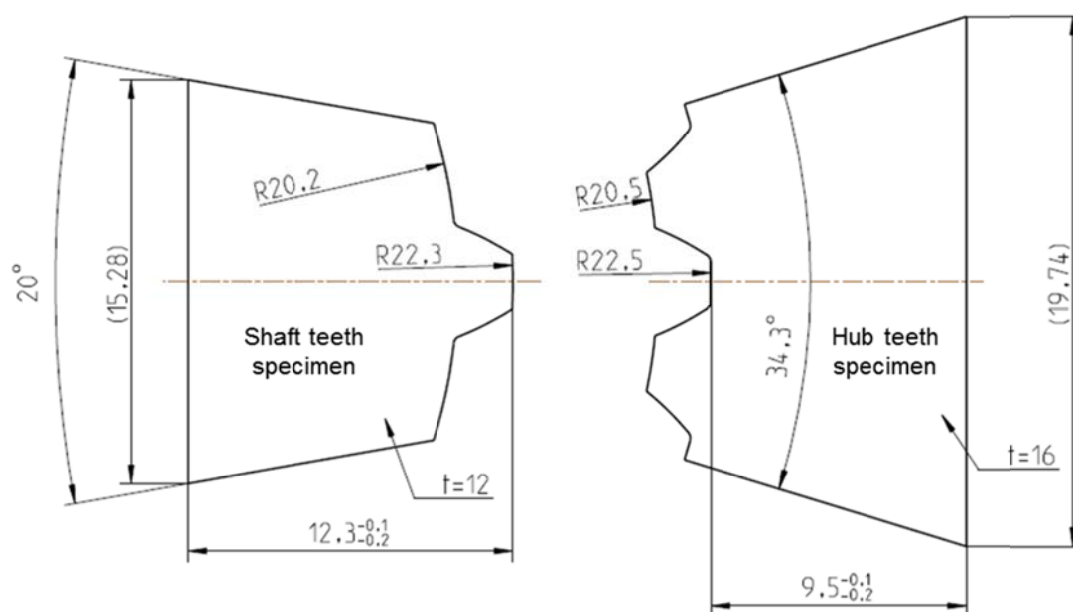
Dimension of representative specimens cut from spline shaft-hub connection DIN5480 45x2x21
